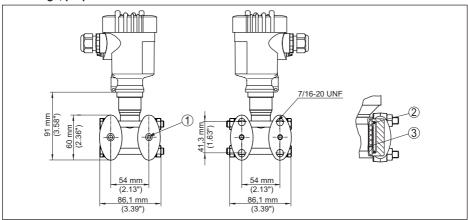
left: Process fitting VEGADIF 85 prepared for chemical seal assembly. right: Position of the copper ring seal
